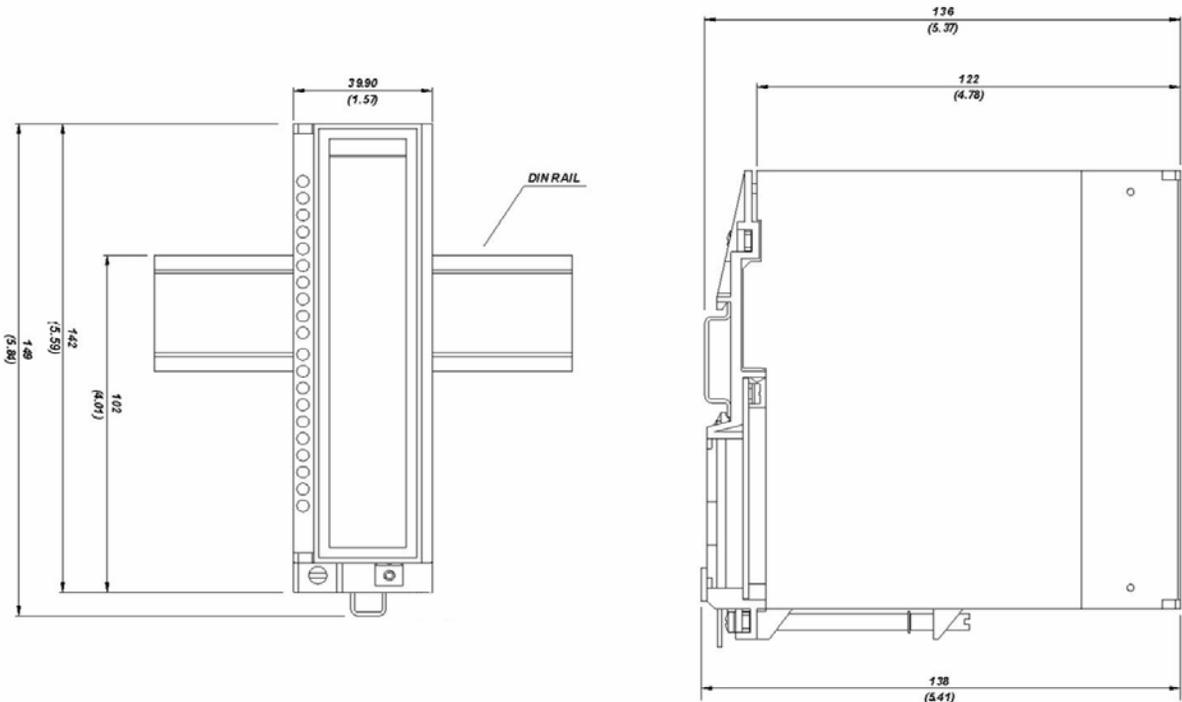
Dimensional drawing of the ICS2.0P mounted in the DF9 support.
